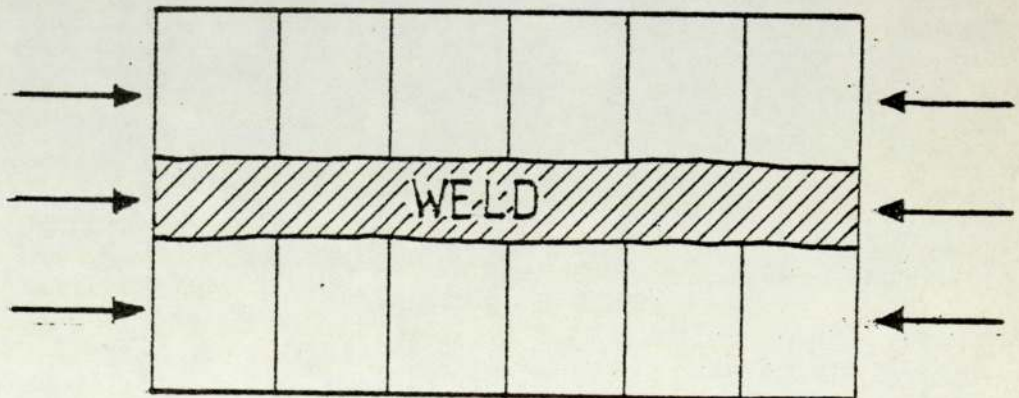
Assembly of strips for Pellini cracking test<sup>55)</sup>.
